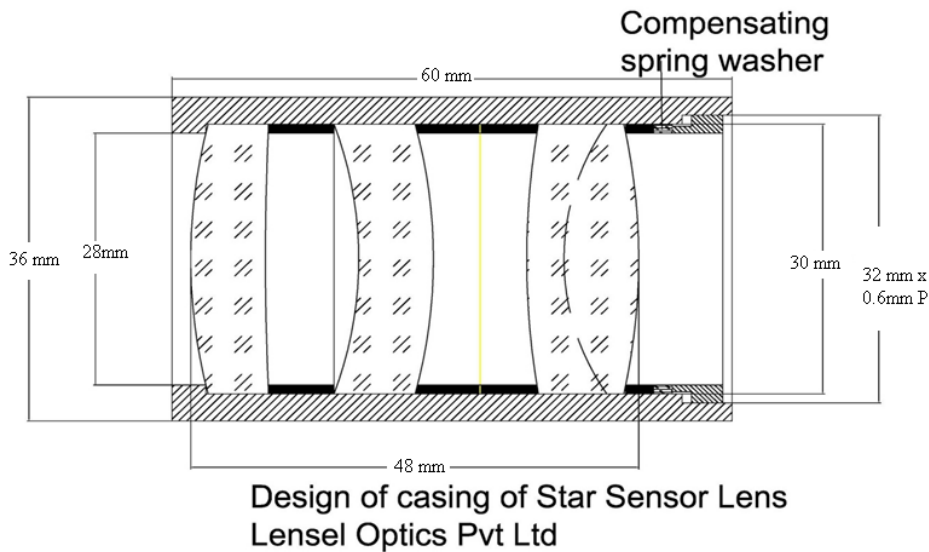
Design of a lens assembly and the housing to hold the lenses fixed at their desired places. A compensating spring washer is used to maintain a preload on the lens surfaces at the point of contacts.
